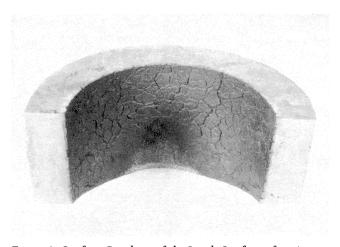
Surface Cracking of the Inside Surface of an American Casting Institute (ACI) Grade Hk-40 Furnace Component from Thermal Fatigue.
